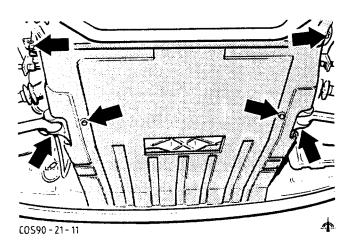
Retaining bolts of lower engine cover. (Sierra shown)
